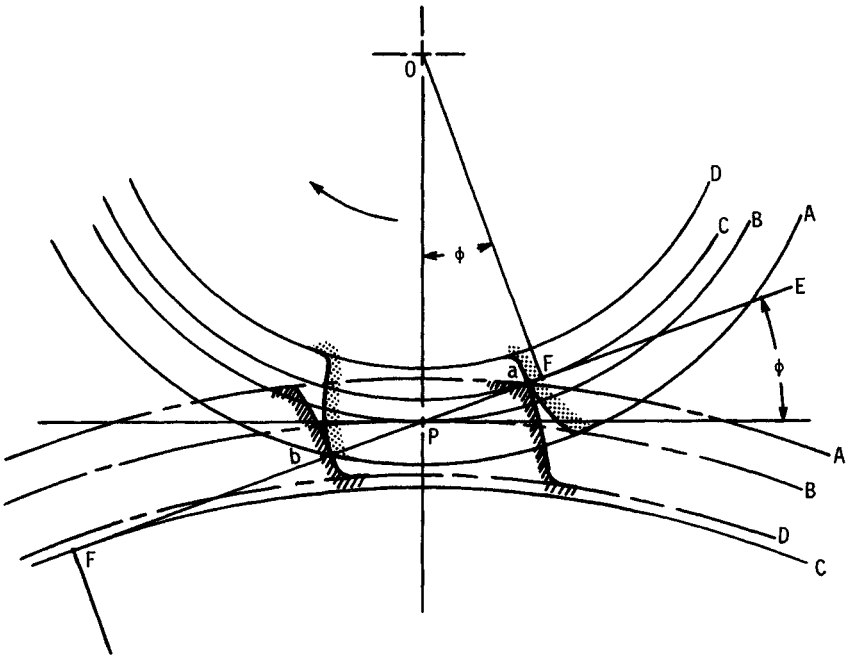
Layout drawing of a pair of spur gears in mesh. The pinion is the driver and rotates clockwise about the axis at O . A , addendum circles; B , pitch circles; C , base circles; D , dedendum circles; E , pressure line; F , tangent points; P , pitch point; a , initial point of contact; b , final point of contact.
